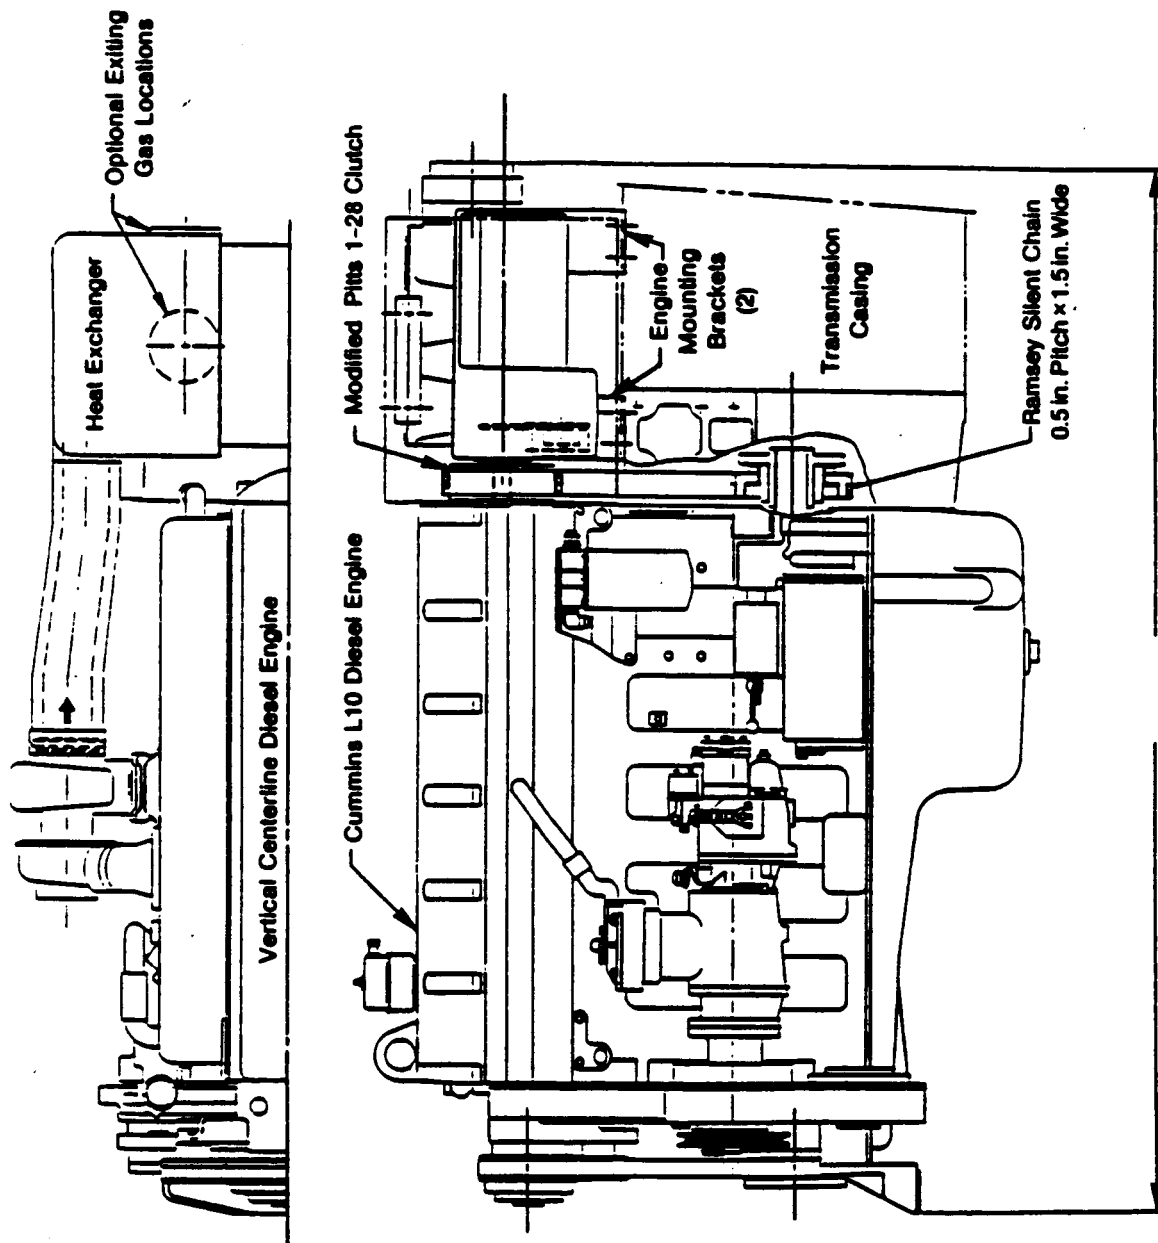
Diesel/Stirling Engine Integration (Side View)
